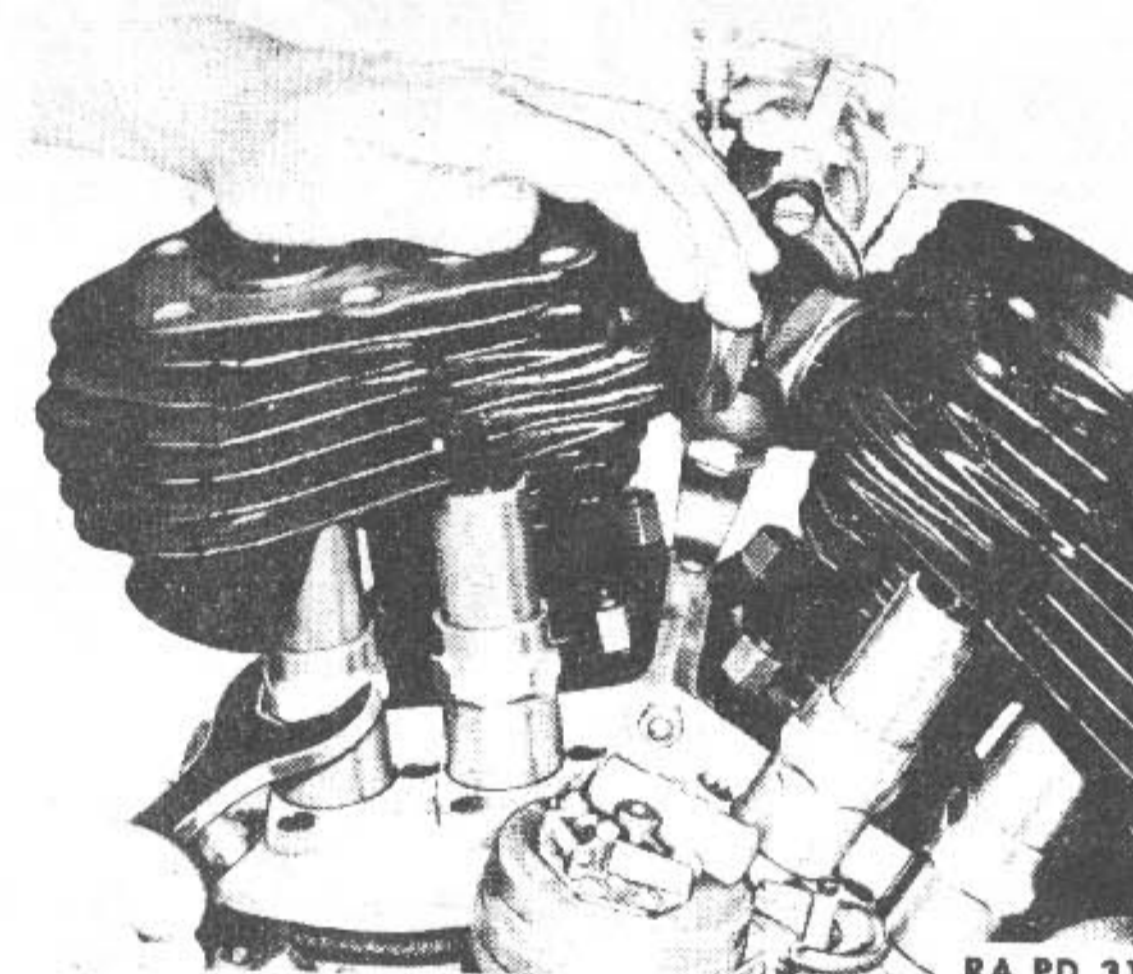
Tightening Valve Spring Covers with Wrench (41-W-3617)
